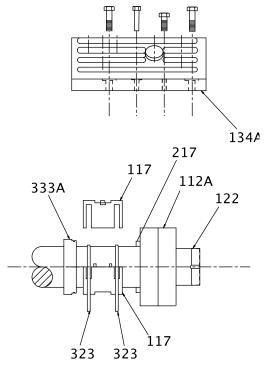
Removal of upper half of thrust bearing and sleeve bearing
